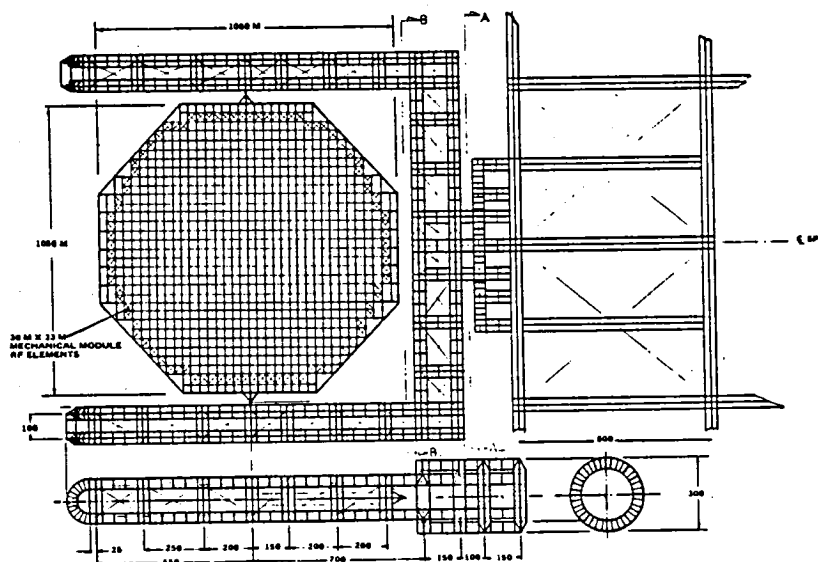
Slip Ring/Yoke/Antenna Structural Layout
